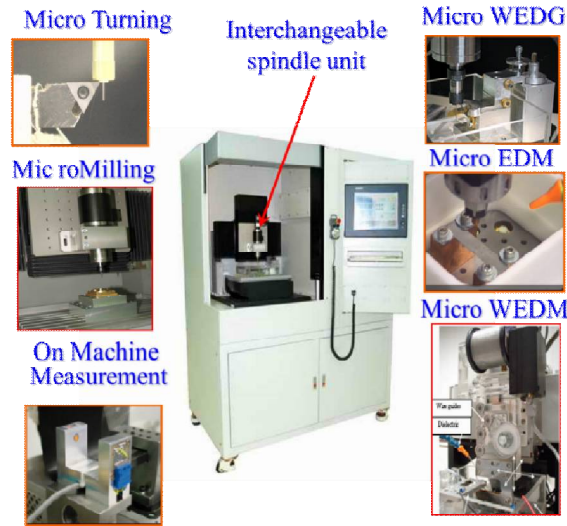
World's First Integrated Multi-Process Machine Tool for Micro Machining. (Machine Model: DT – 110). [7]
